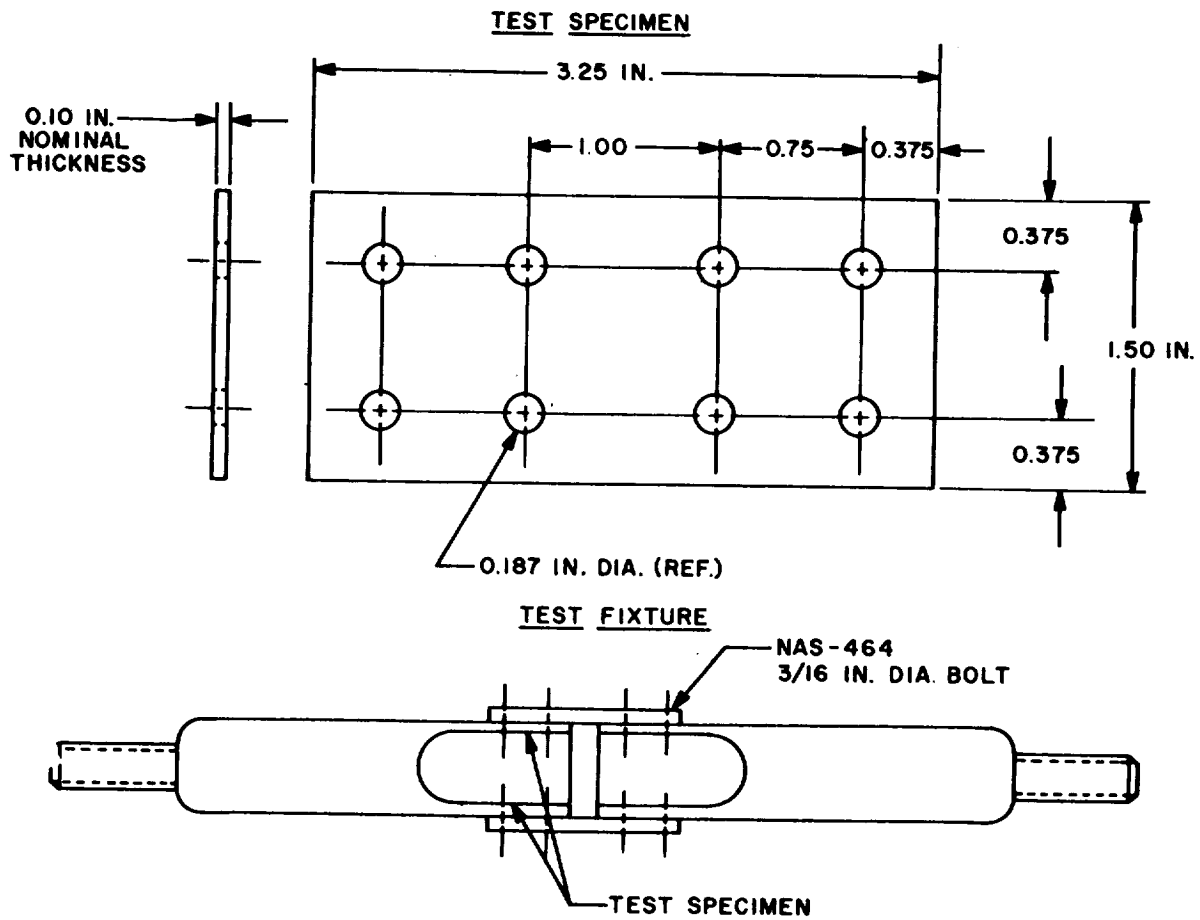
Test Specimen and Fixture Used for Second Series of Tests⁵⁷
